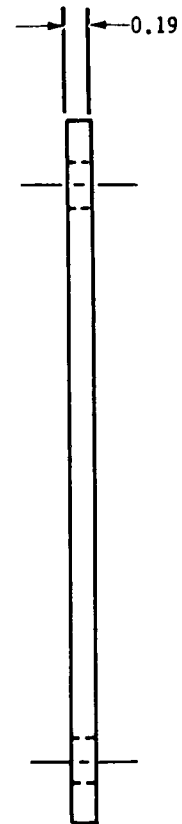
Dimensions for Adapter Plate-11021189, Unit 2, ISO-2-1.
